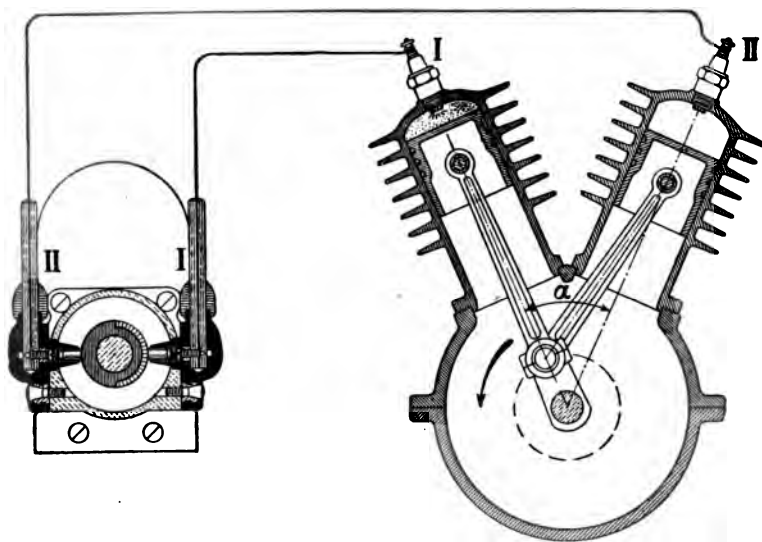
Wiring diagram of a twin-cylinder motor with a ZEV magneto
